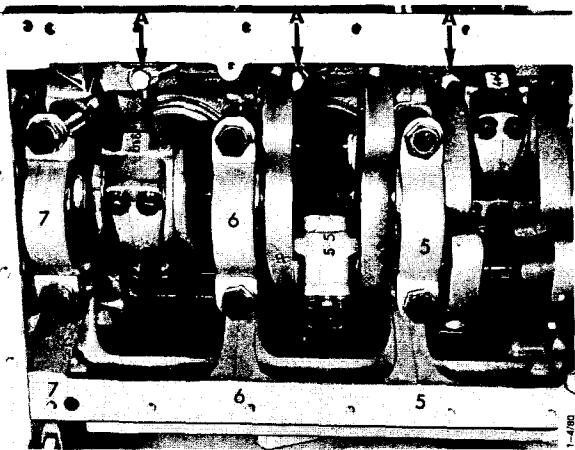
Marking of connecting rods, cylinder block and bearing caps
